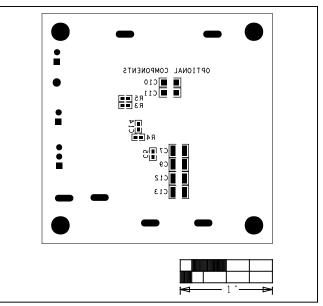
MAXM17503 EV Kit Component Placement Guide— Solder Side
